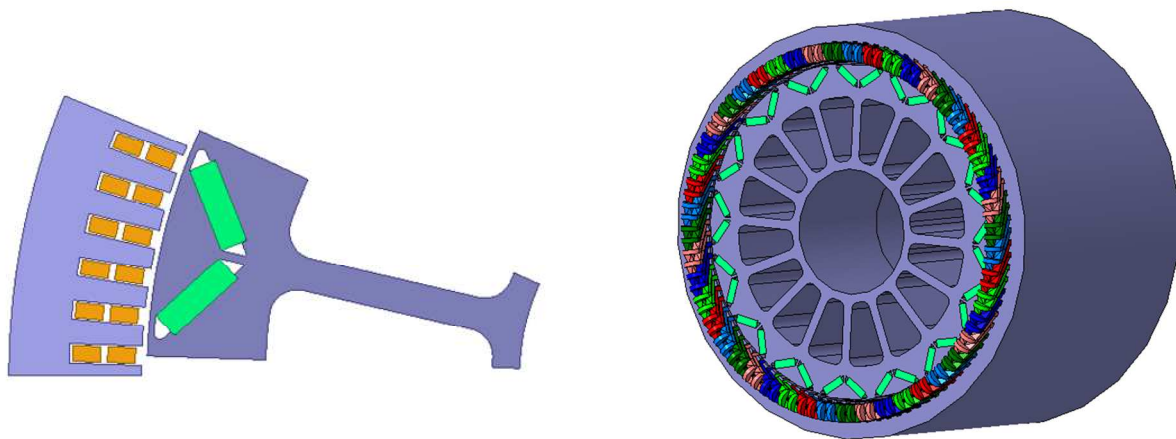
Orientation of the permanent magnets inside the rotor (left) and mechanical design of the secondary electric machine without housing (right)
